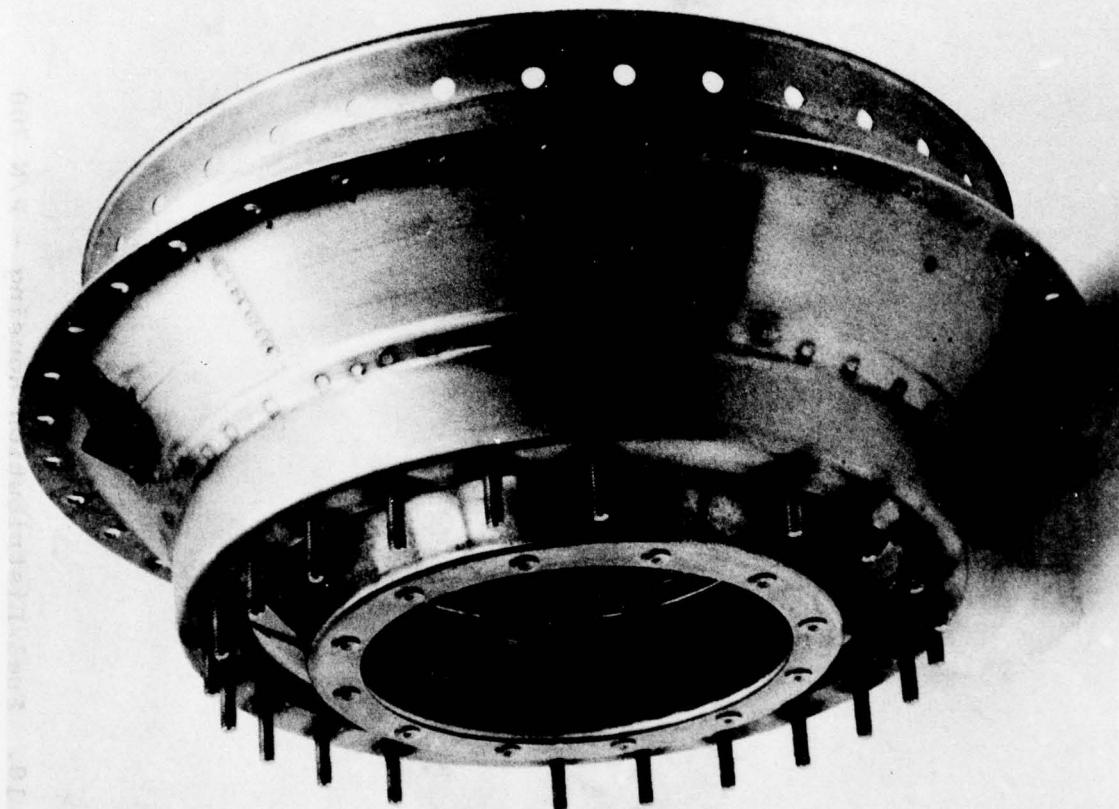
Turbine Exhaust Housing Assembly - P/N 400
